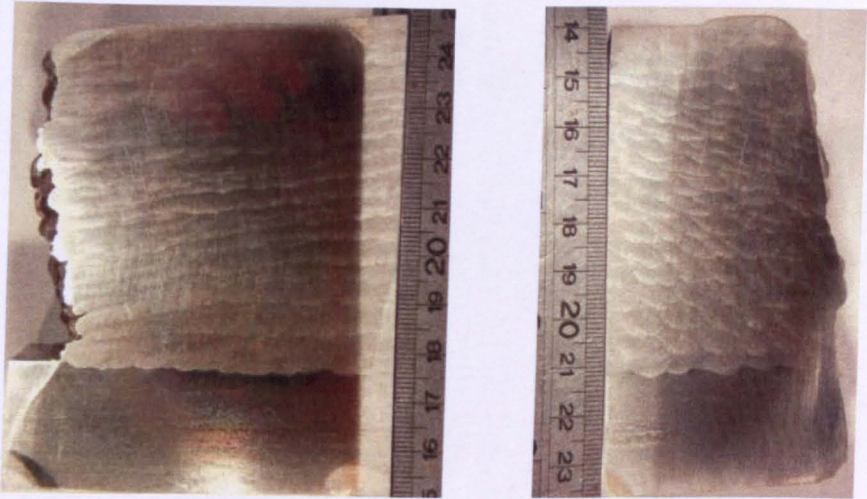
Various views of multi-pass weld-pad (316 austenitic stainless steel). The surface was polished to show the weld beads. All the dimensions are in mm.
